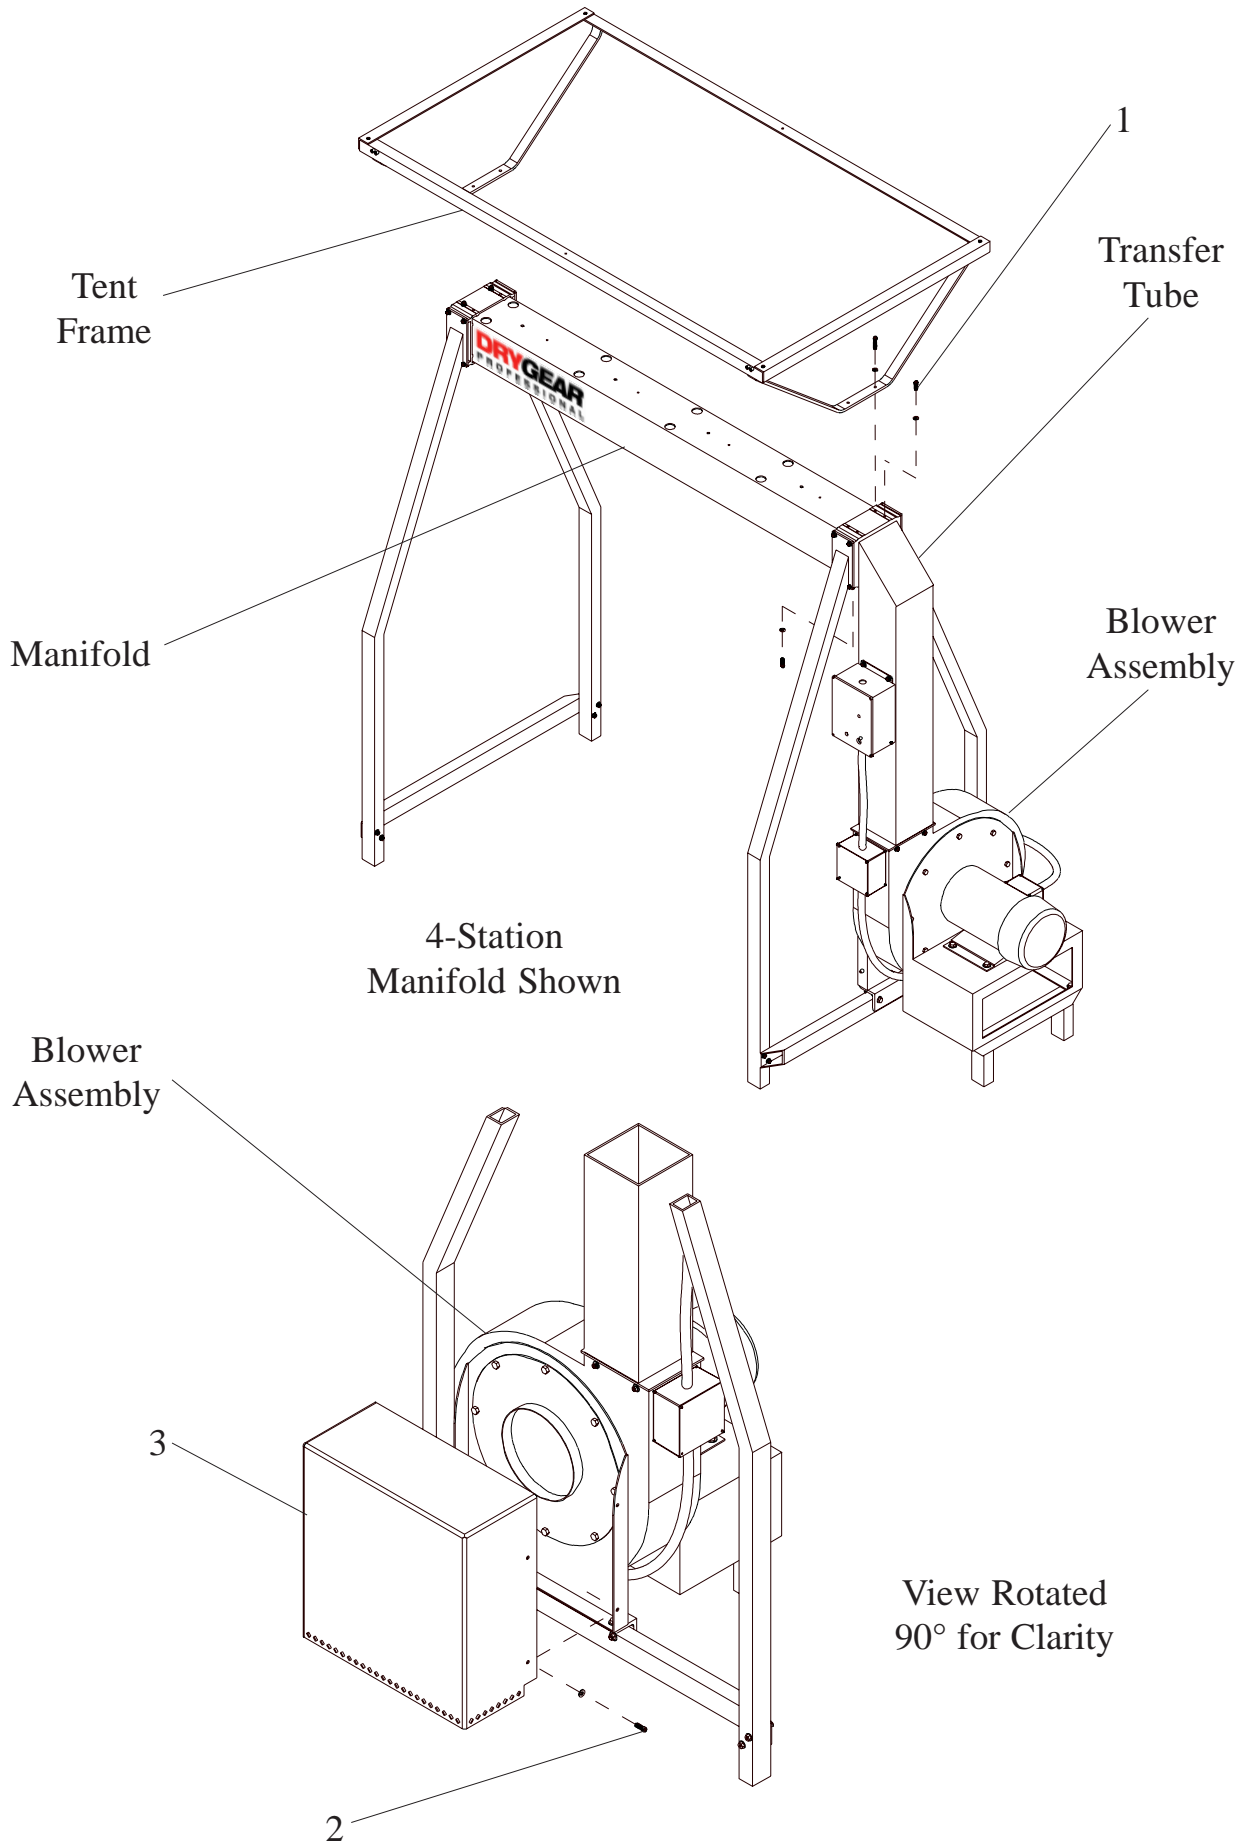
Manifold, Tent Frame, and Muffler Assembly
